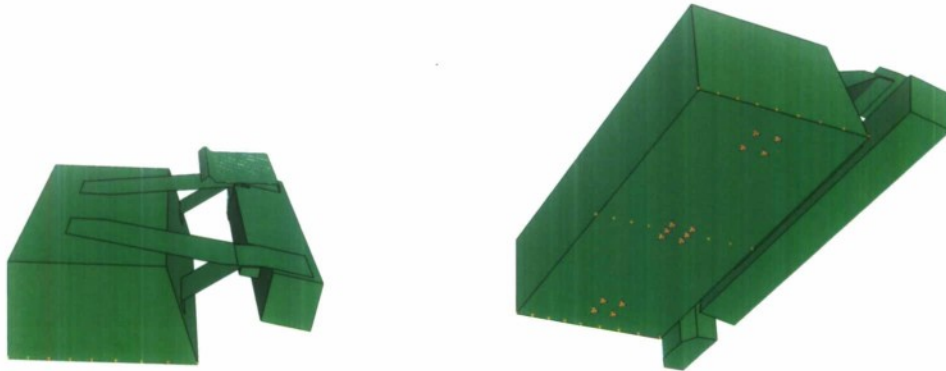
Counter measure and radar box with support fixture: boundary conditions highlighted at the bottom of the support fixture.
